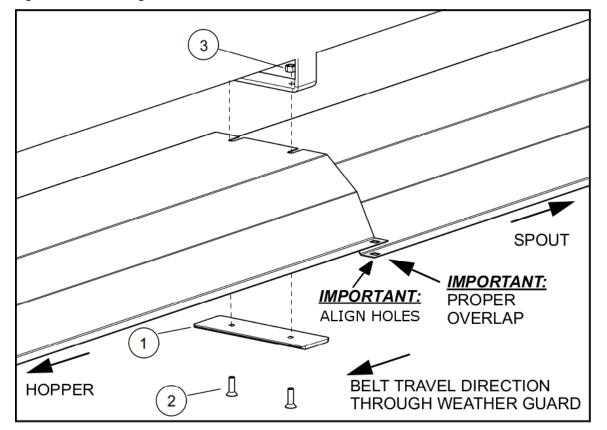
Weather Guard Section Locations (65' — 75' Models)
